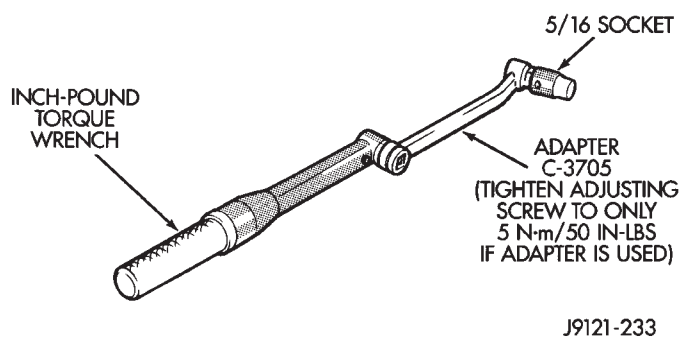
Using Band Adjustment Adapter Tool C-3705
